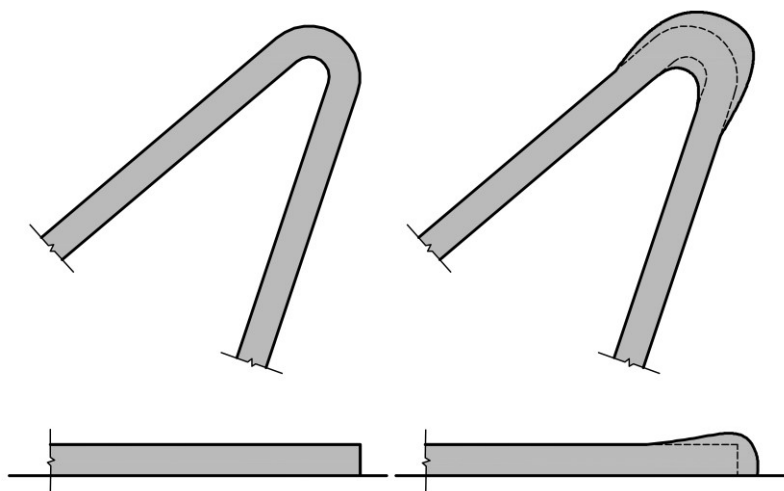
Desired shape of a sharp corner (left, top and side view) and real obtained shape (right, top and side view)
